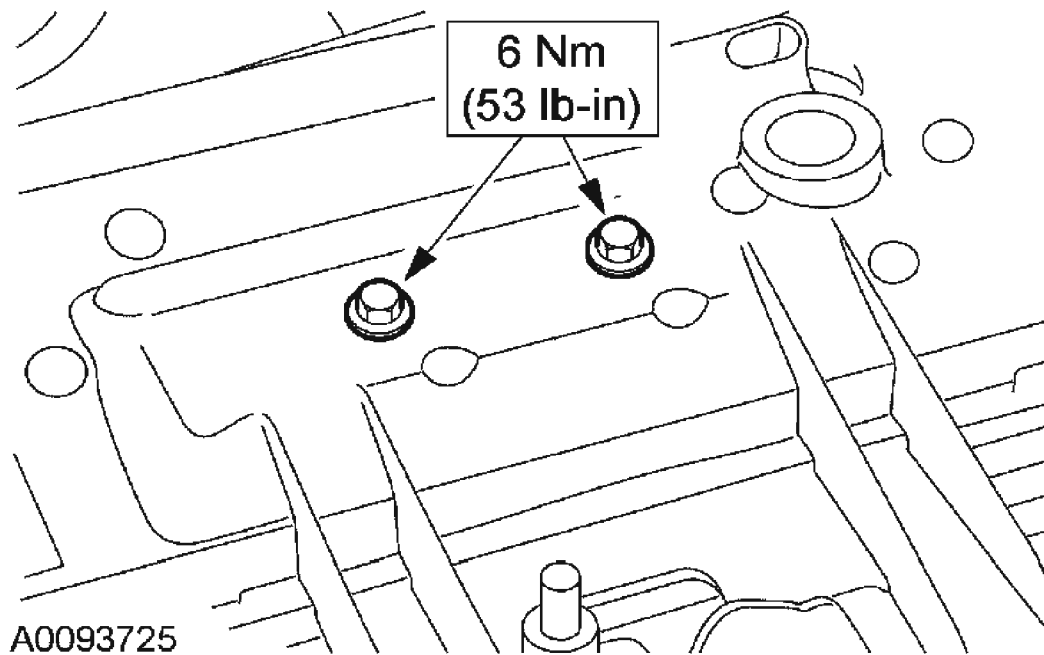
Removing Front Impact Severity Sensor Bolts From Radiator Grille Opening Panel
